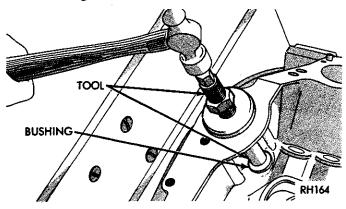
Installing Distributor Driveshaft Bushing (Tool C-3053)
